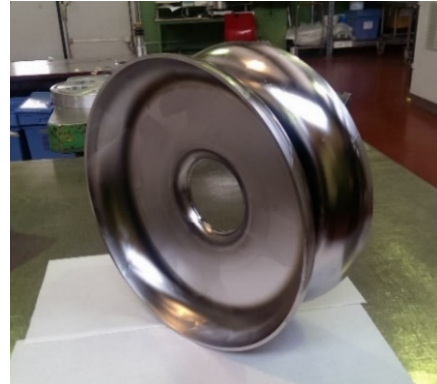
Large Grain dumb-bell ready to be welded to form the cavity.
